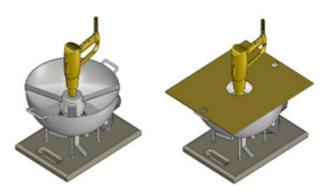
Final assembly of the machine without cover (left) and with cover (right).
